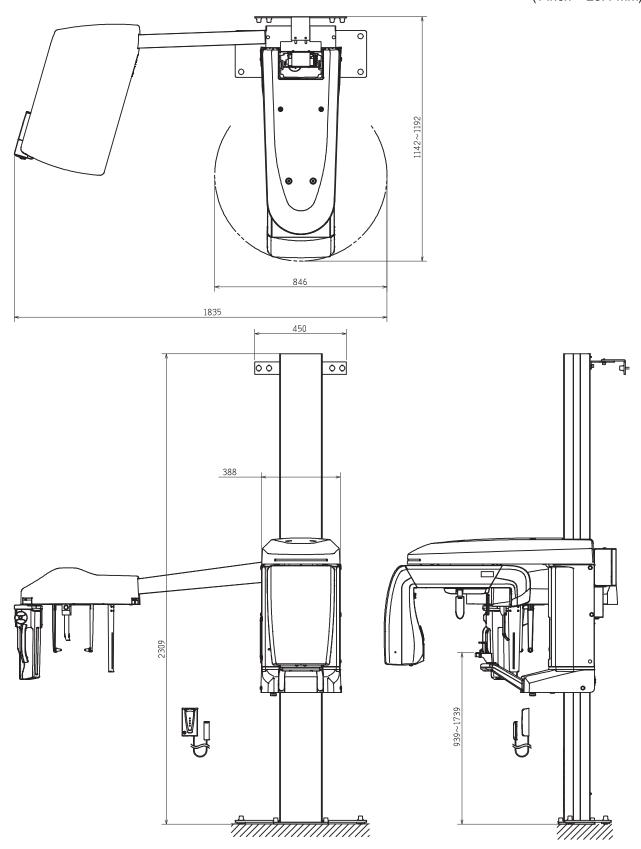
21: Standing position wall-mount long type: Cephalometric type
